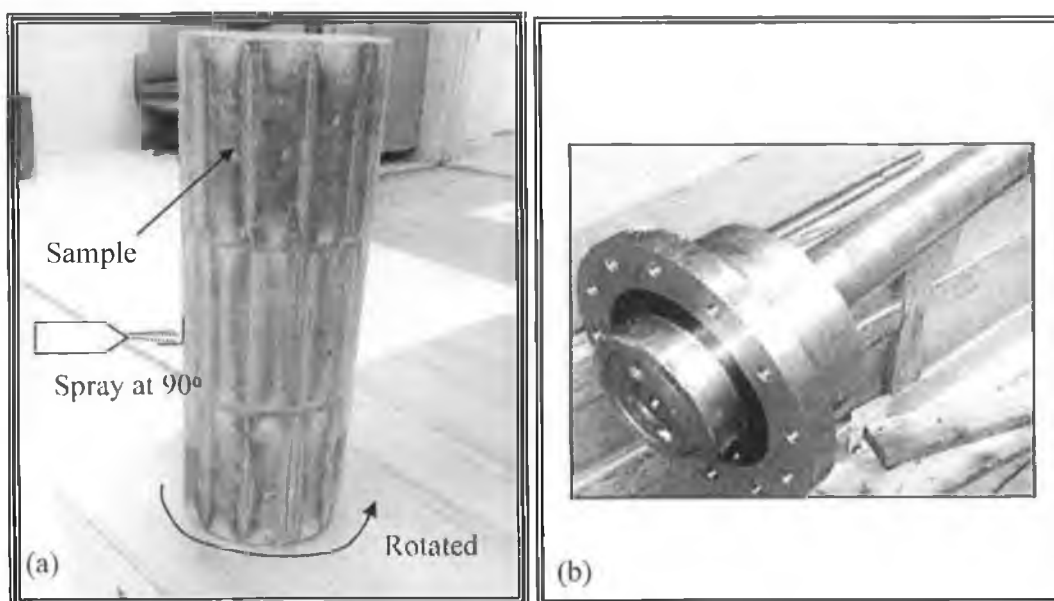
Photograph of the modified test samples holder, for spraying angles of 90 (a) and shaft requiring repair (b).
